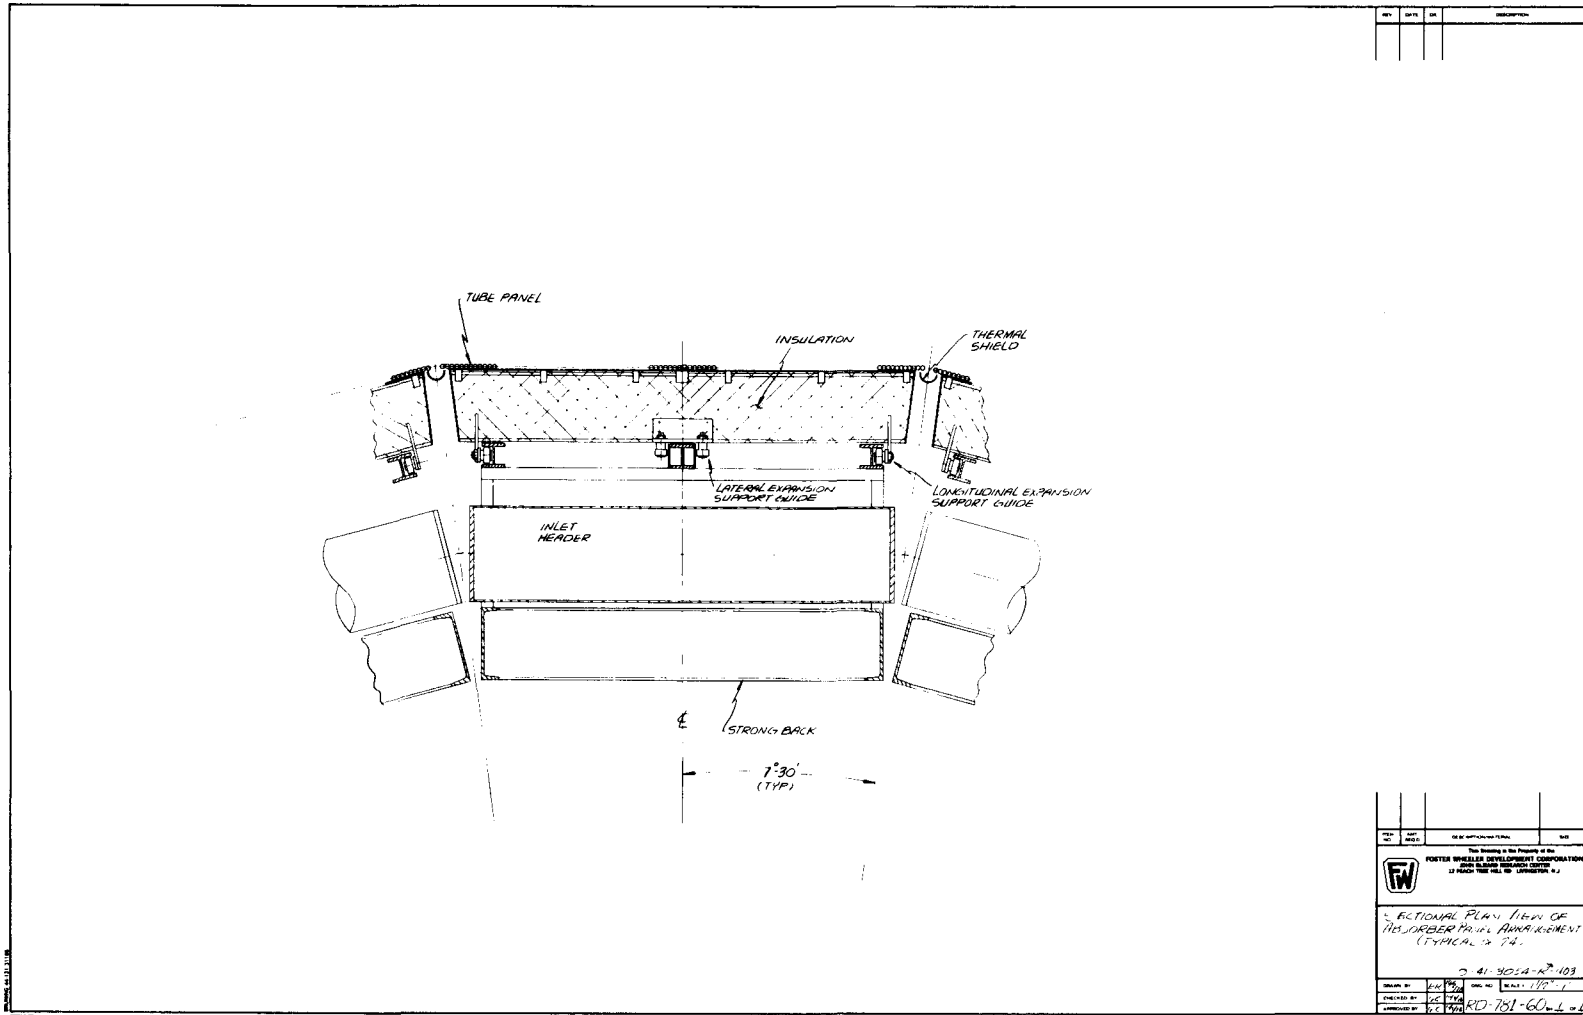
Sectional Plan View of Absorber Panel Arrangement
